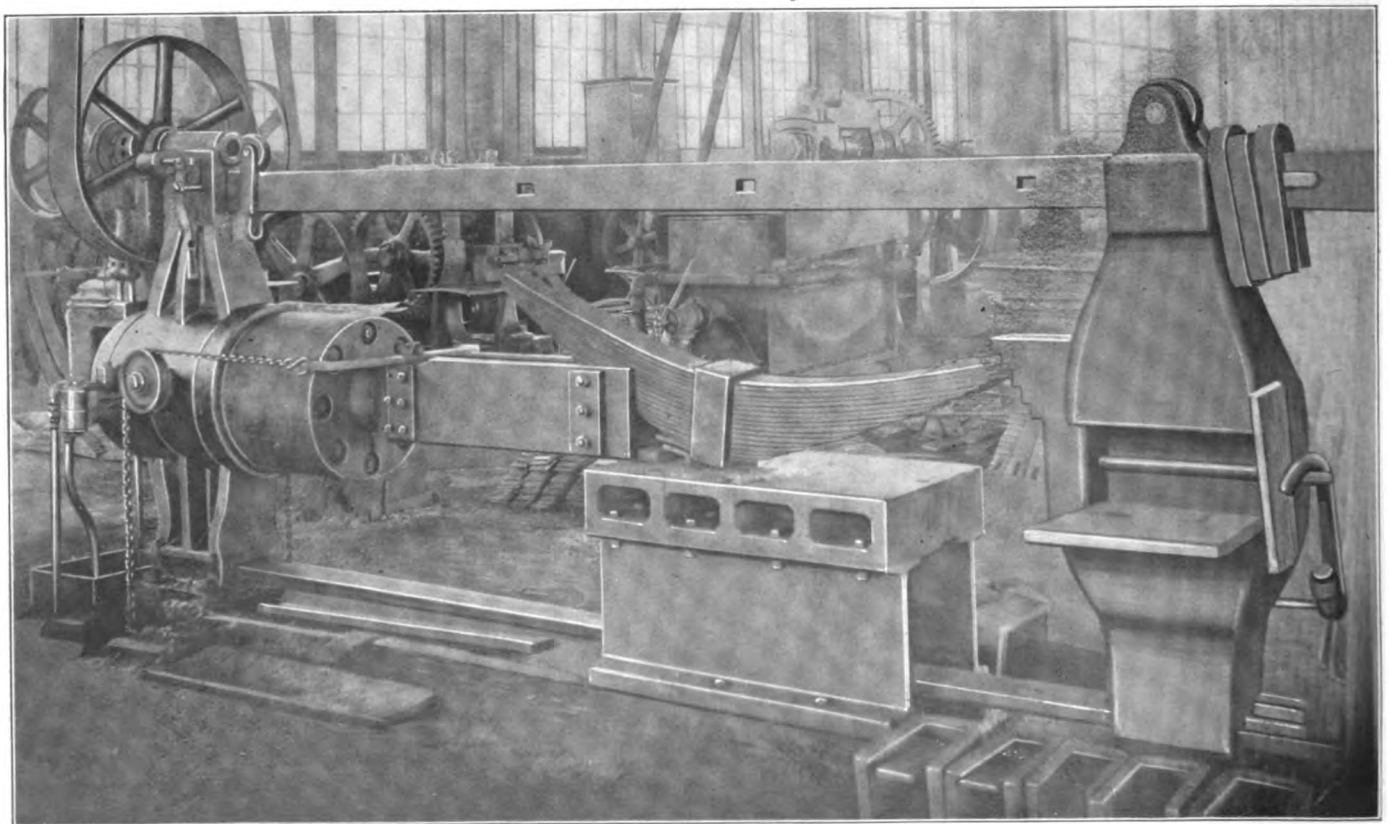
Wheel Press Arranged for Pressing Off Spring Bands.
